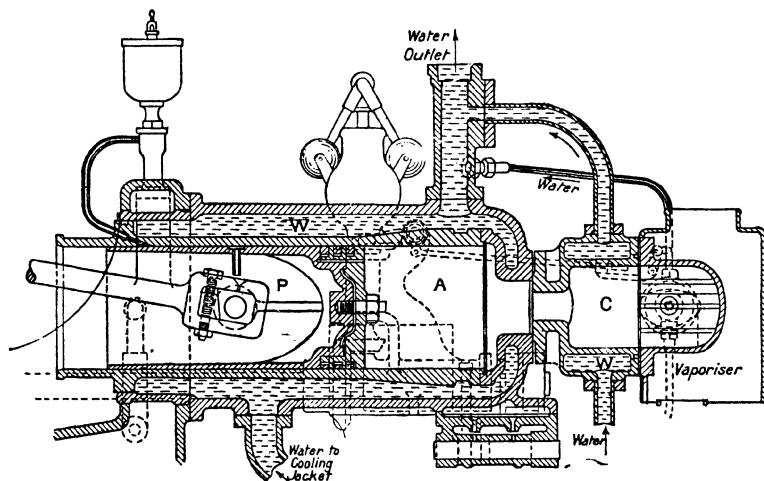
Hornsby-Akroyd Oil Engine (1896)
